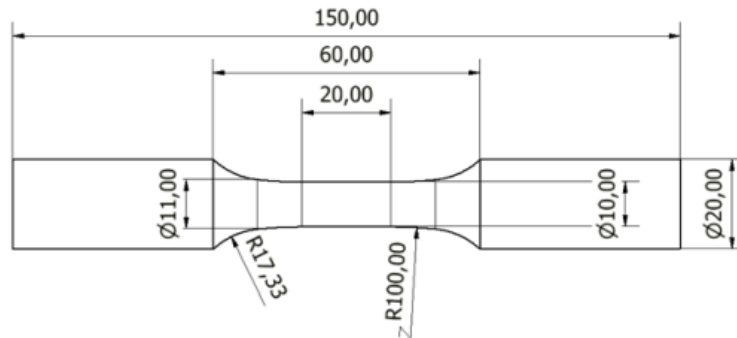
Schematic drawing of fatigue specimens (all dimensions in mm).
